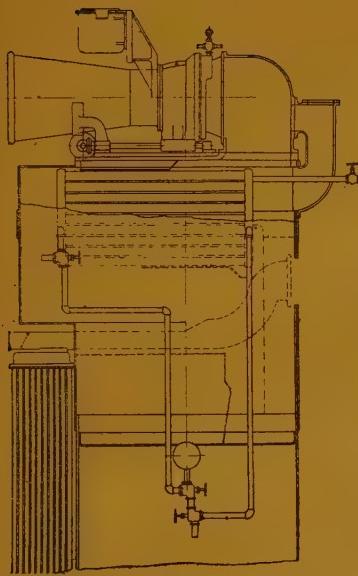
Modified front end, equipped with induced draft fan and feed-water heater.
